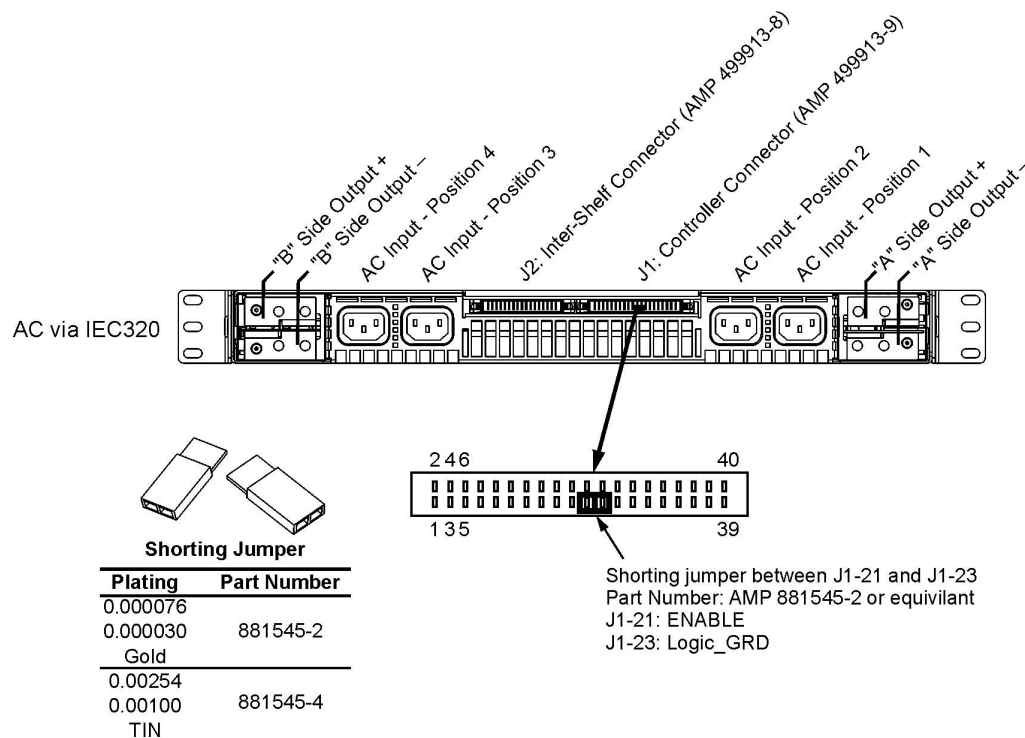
Connector Locations (rear view) and ENABLE jumper, IEC-320 inputs
